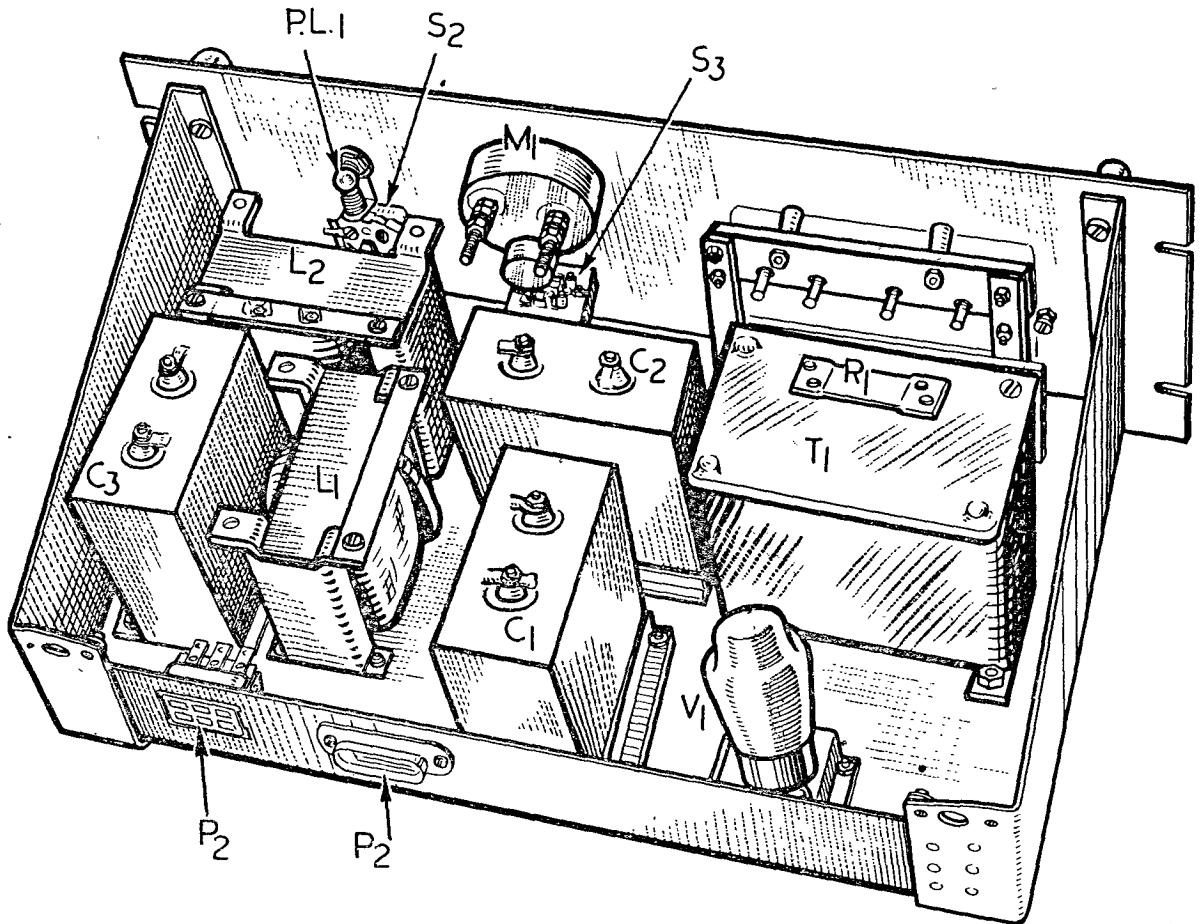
Power unit, type 234A, top view of chassis showing components
